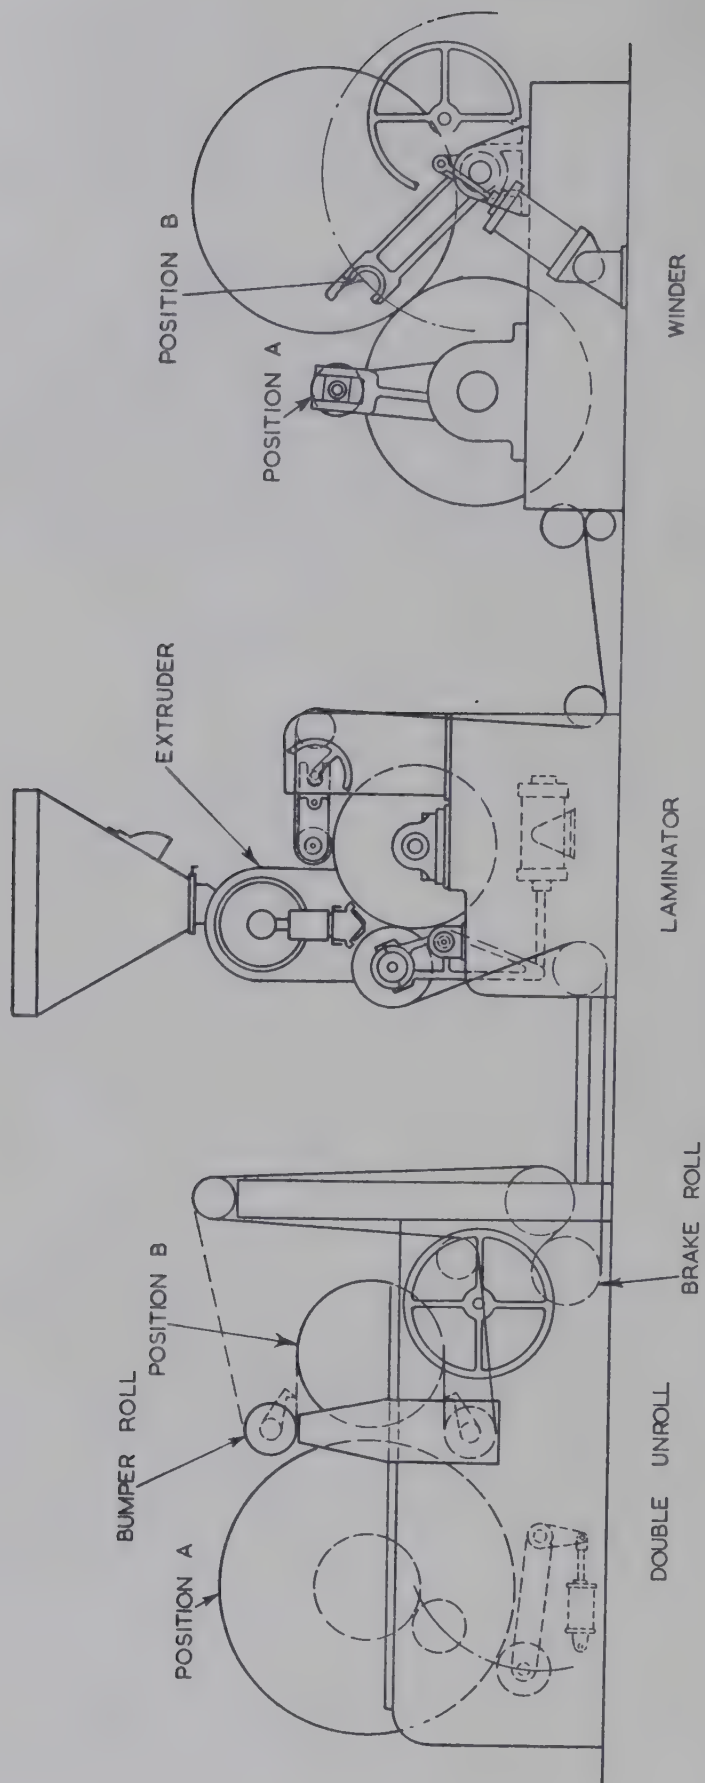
Lay out of extruder, rolls and winder for extrusion coating
